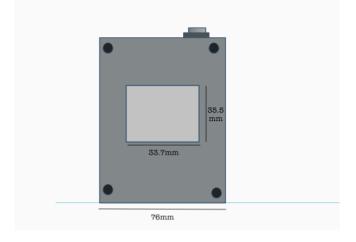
Width Dimension of Rangefinder Enclosure/OLED Dimensions
